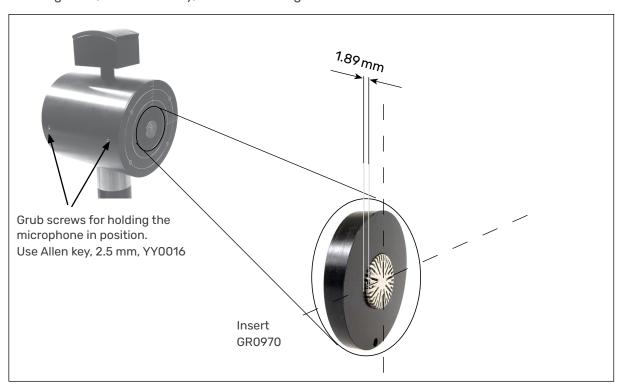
The microphone can be removed for calibration when the insert and cover plate have been removed. When reinstalled, it must be located precisely as shown, protruding 1,89 mm at the horizontal center line.
